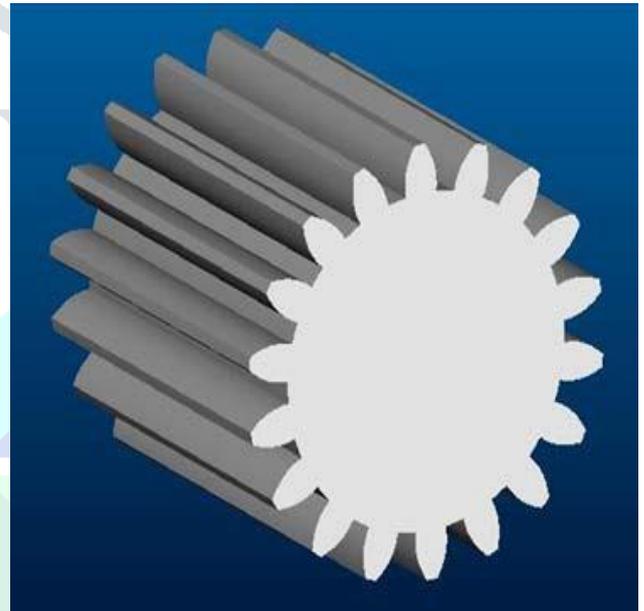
Normal fillet tooth sun gear in PRO-E (3D view).
